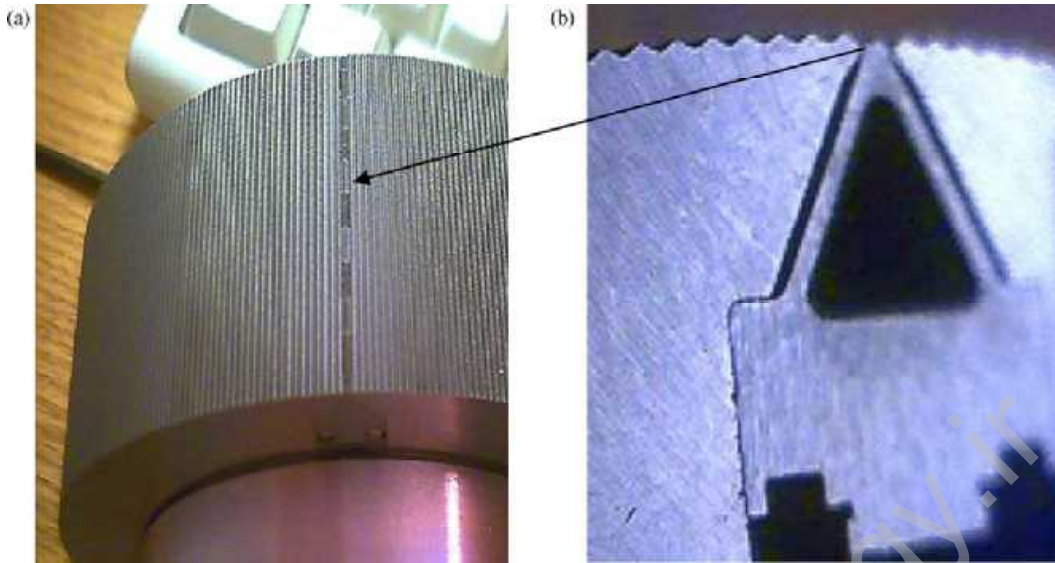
(a) Side view of instrumented roll with roll load. (b) View of textured roll surface with five load cells across the roll.
